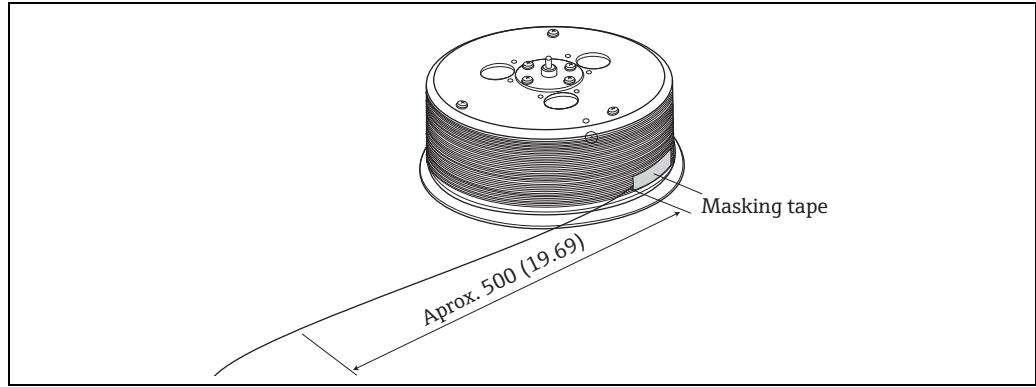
Wire and wire drum, unit of measurement: mm (in)
